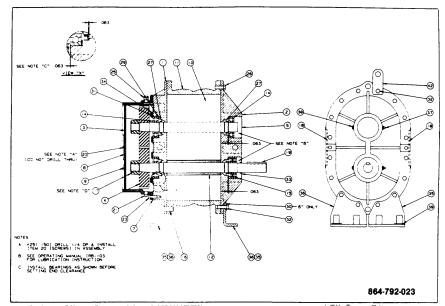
Assembly of UNIVERSAL RAI® Blowers, 6" and 7" Gear Diameter
